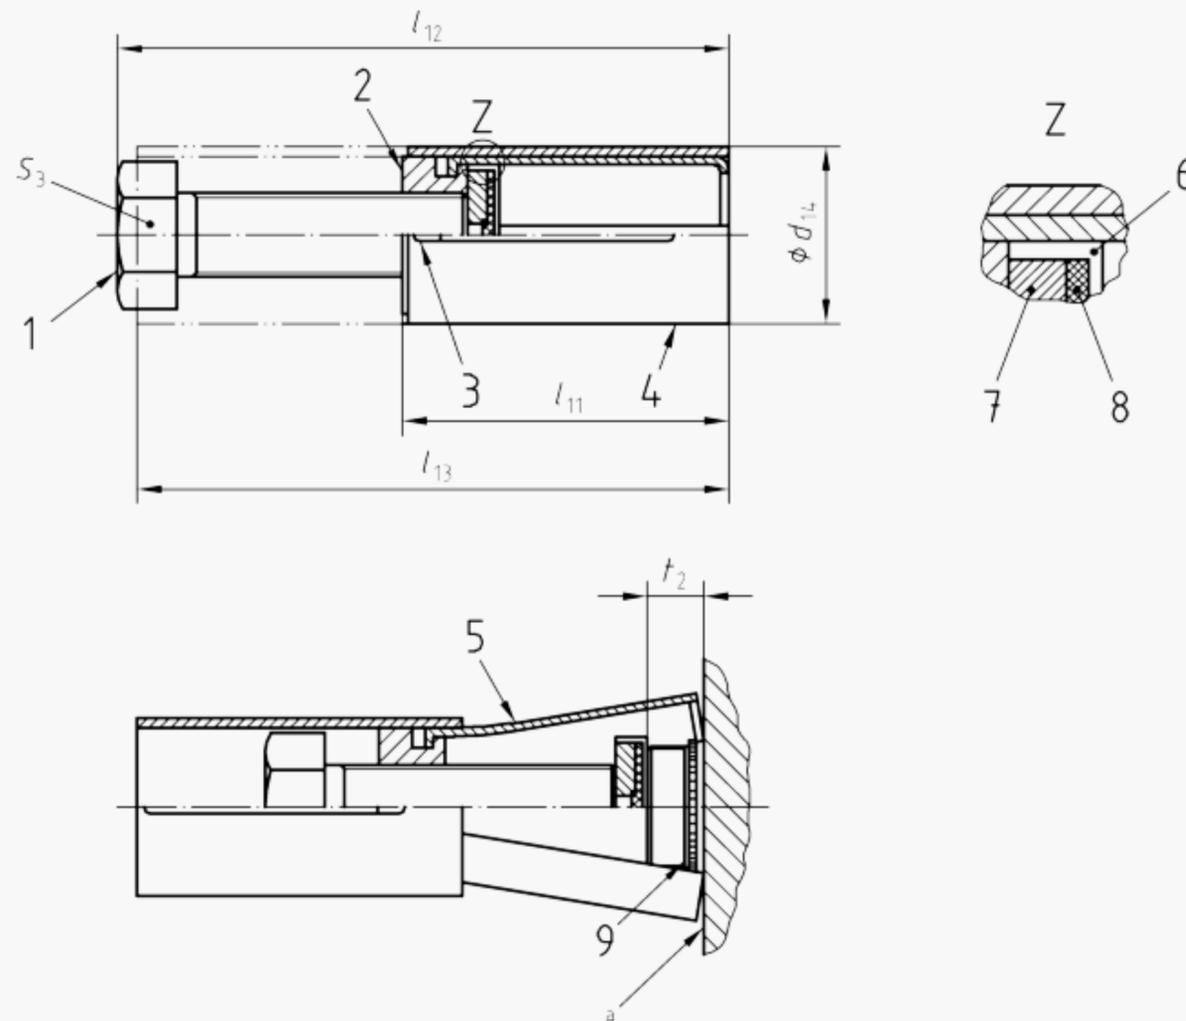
Sleeve over, puller half ready for torquing of bolt
